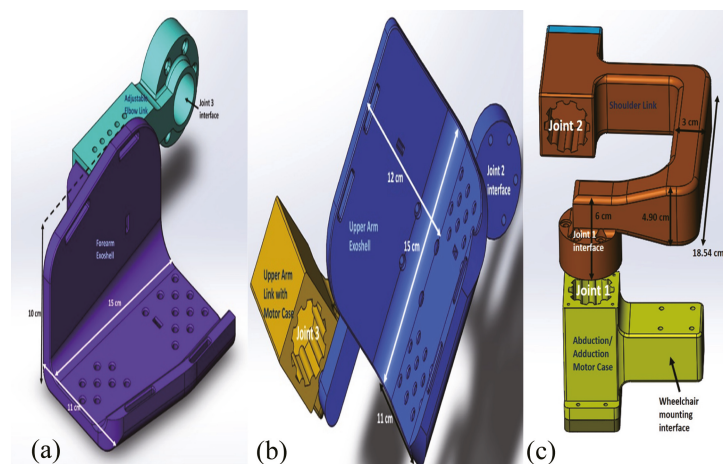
(a) Adjustable elbow forearm assembly, (b) shoulder flexion/extension assembly, and (c) shoulder horizontal abduction/adduction assembly of the exoskeleton.
